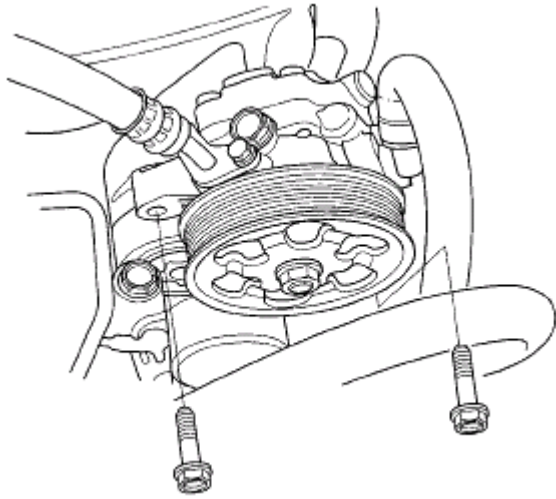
Identifying Power Steering (P/S) Pump With Bolt
